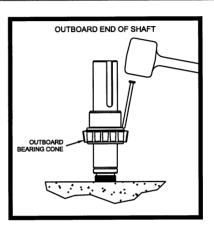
Removal of Outboard Bearing Cone (Option #2)
